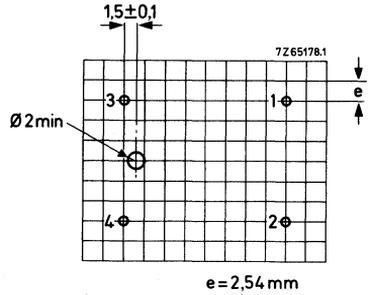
Hole pattern for mounting on a printed-wiring board, viewed from component side. Hole diameter $1,3 + 0,1$ mm.
